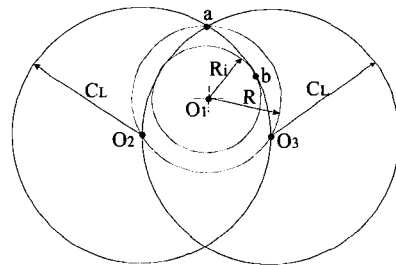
Principle of triple flighted screw section drawing in twin screw extruder
